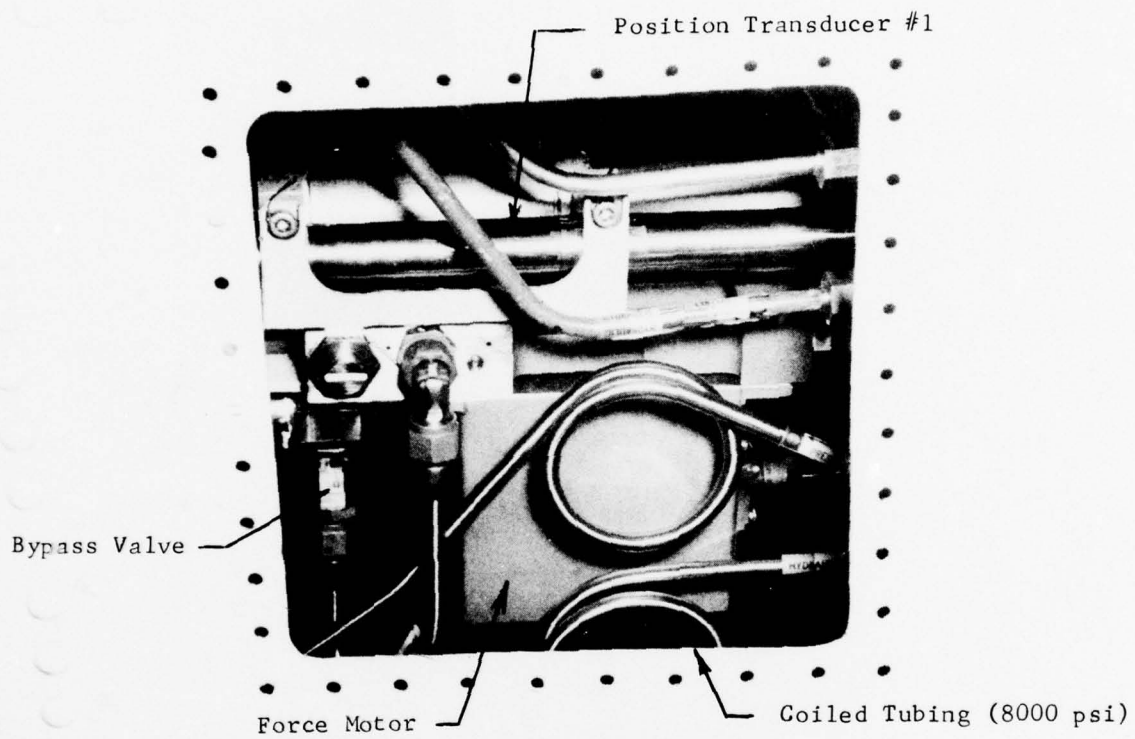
RUDDER ACTUATOR INSTALLATION
